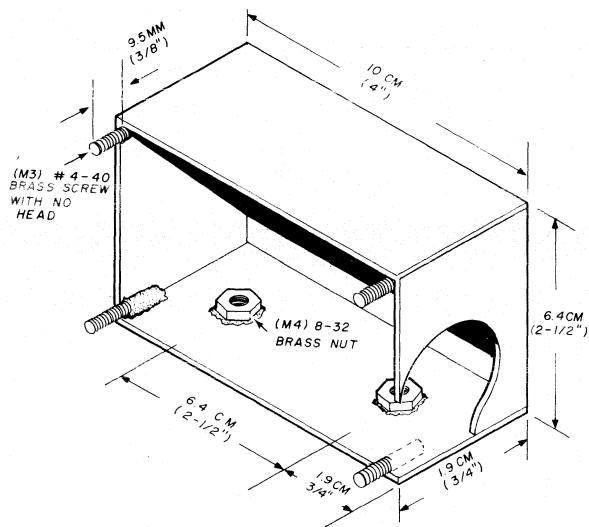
Construction details of the analog modules. Each box is constructed from pieces of circuit board soldered into the desired shape and size.
